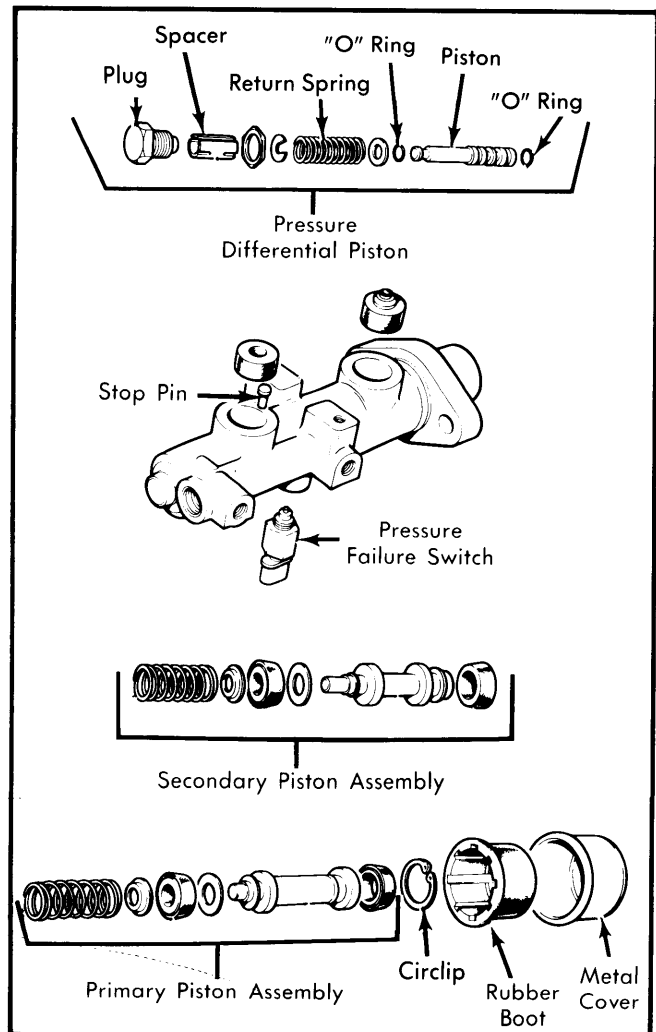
Exploded View of TR7 and TR8 Master Cylinder
